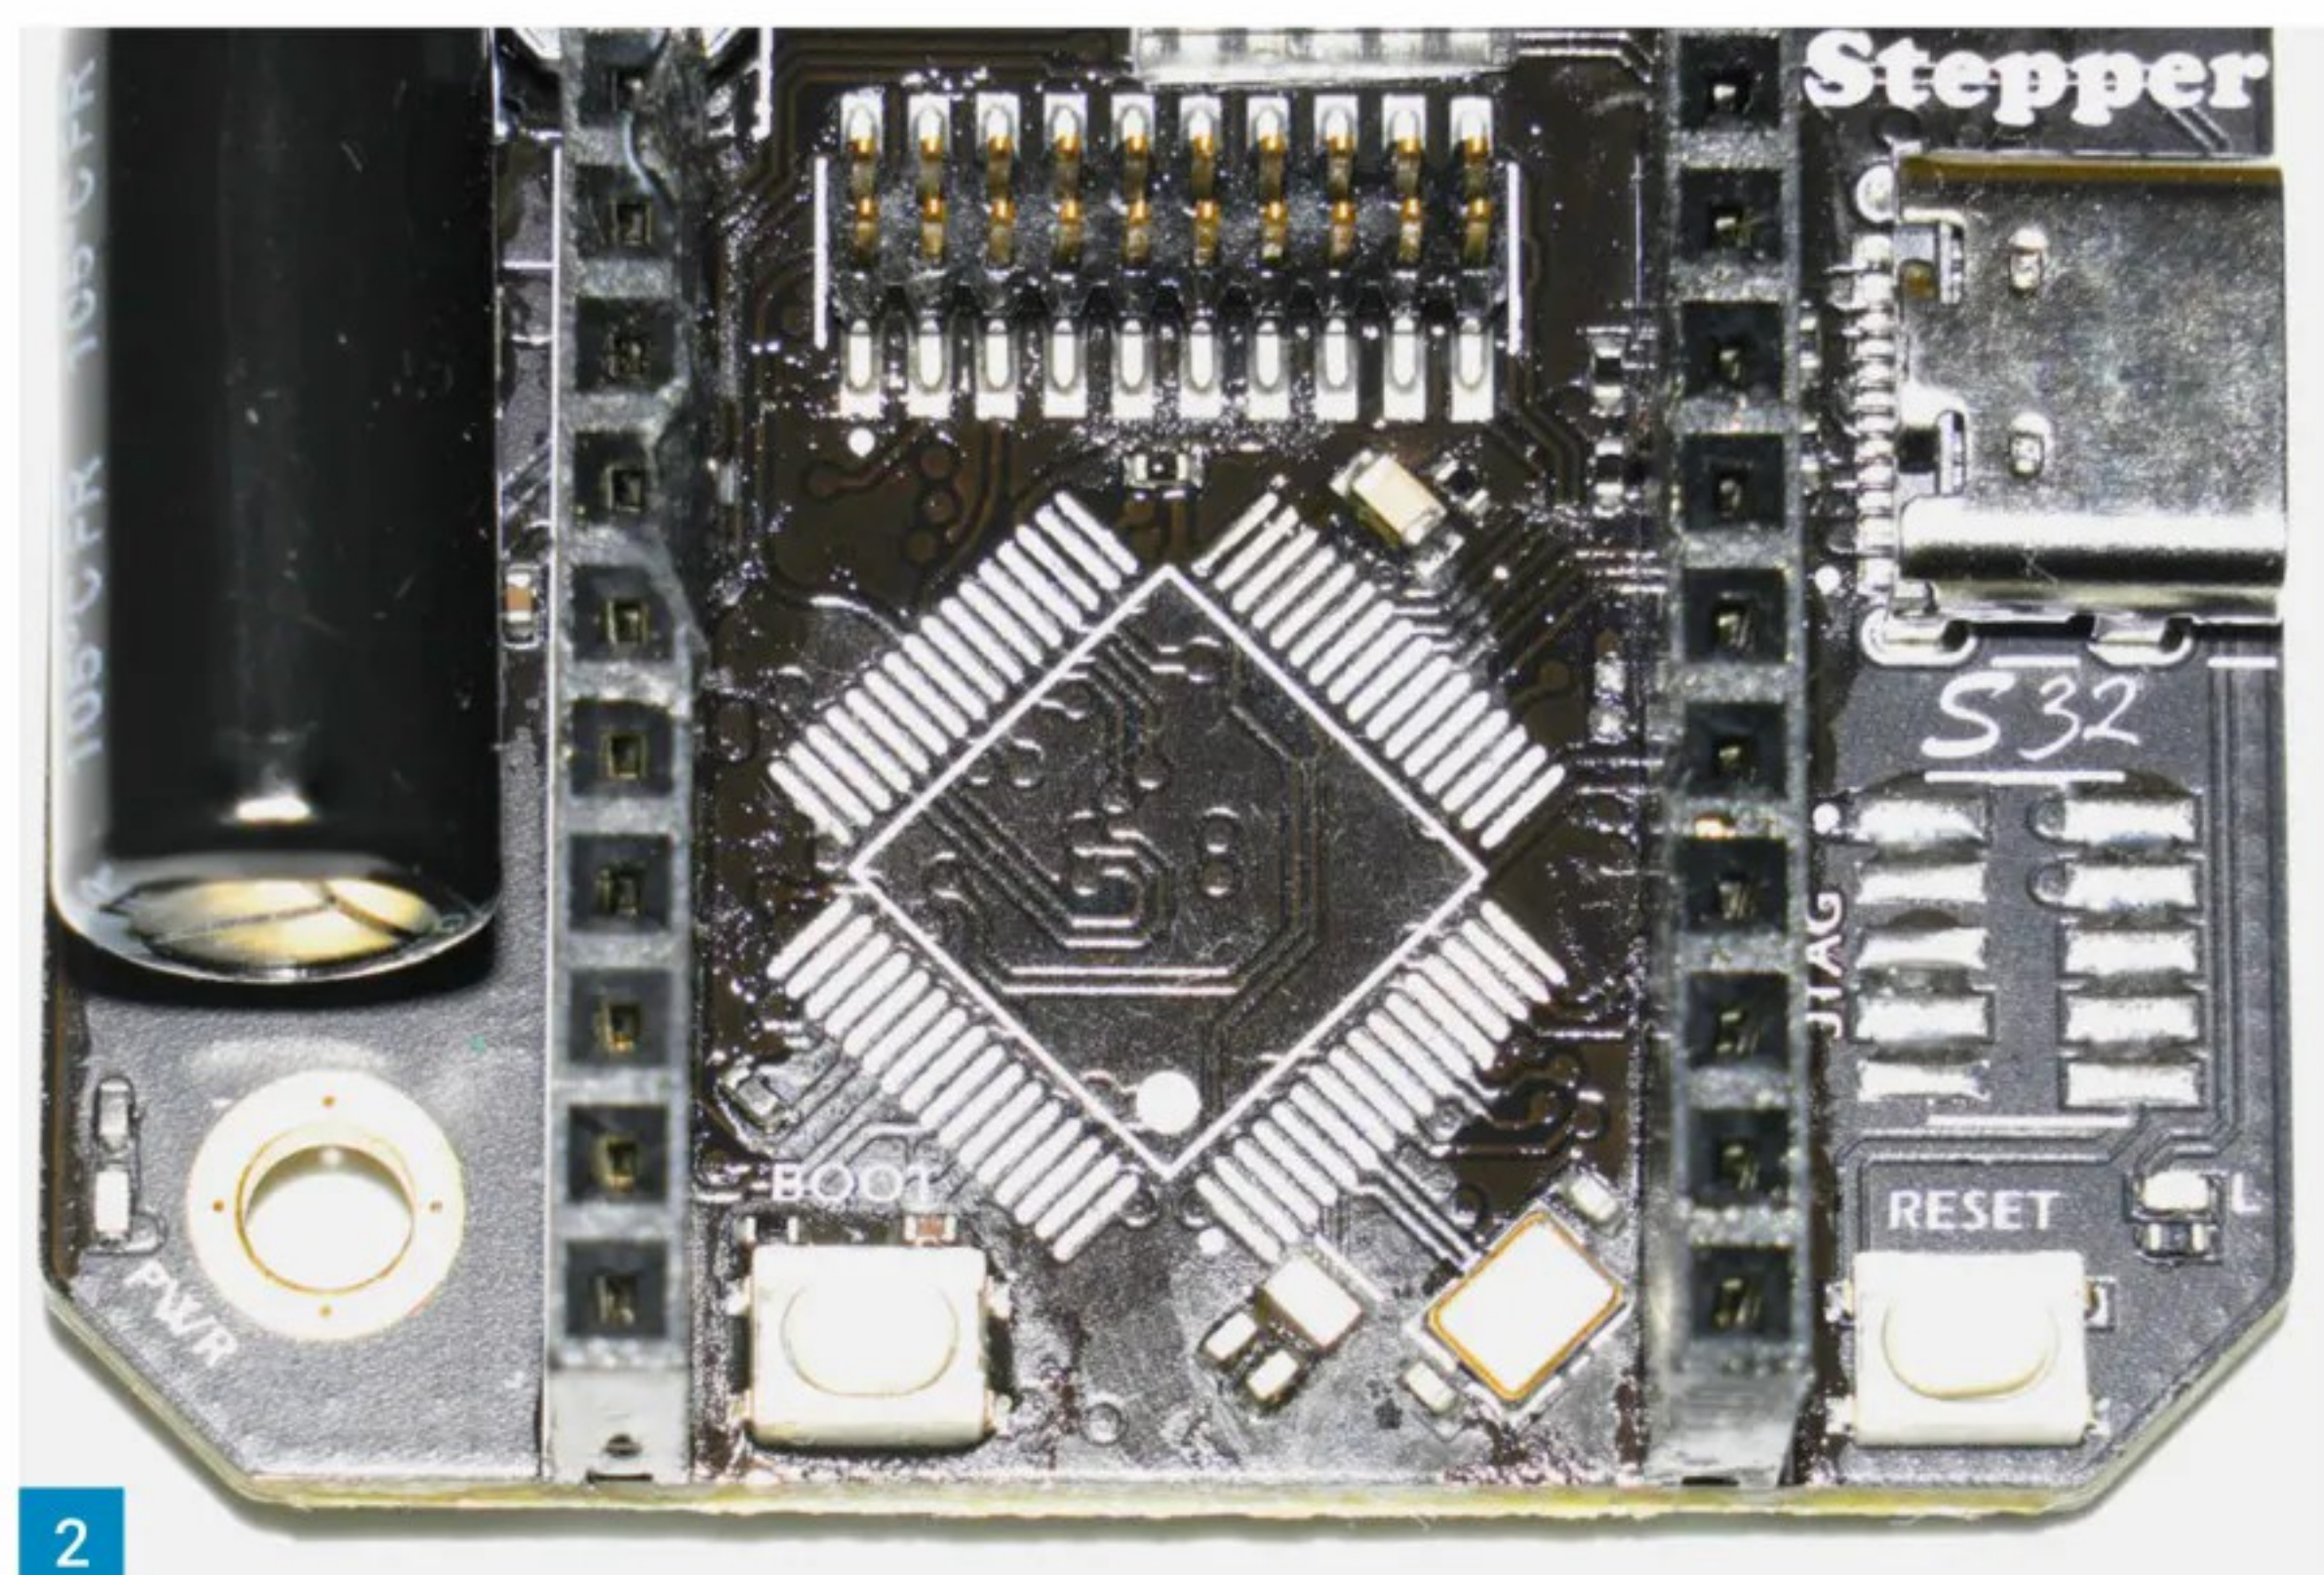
Low melting point solder applied to chip prior to removal. Fig. 2: Motor control board ready for a replacement processor.
